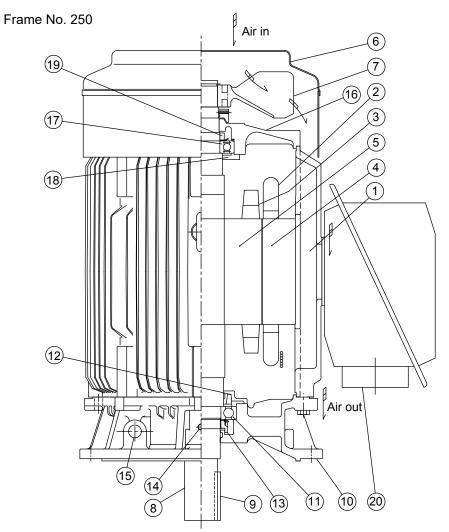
Section Drawing of Vertical flange mount (Frame size 250)
